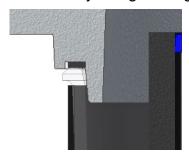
Detail of gasket seated along casting gasket groove.
